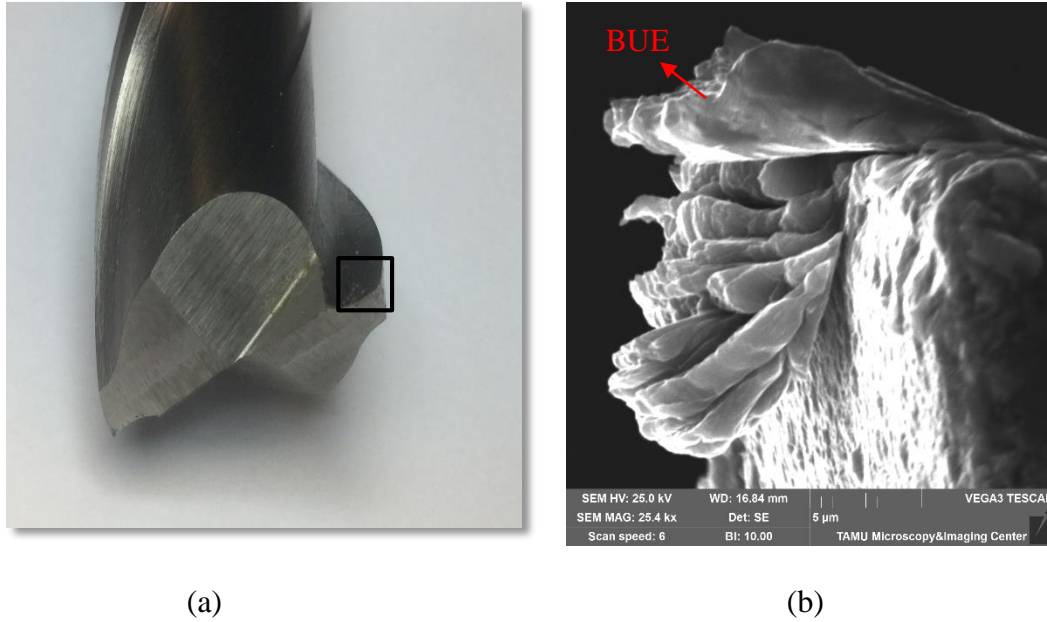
(a) Flat end mill showing view area of micro end mill tool. (b) Scanning electron microscopy image of rake surface and cutting edge. AlTiN WC tool with BUE, $\Phi 0.800$ mm, 10 m/min speed, 2-8 $\mu\text{m/tooth}$ chip load, 30 μm depth, 48 mm milling length, MQL.
